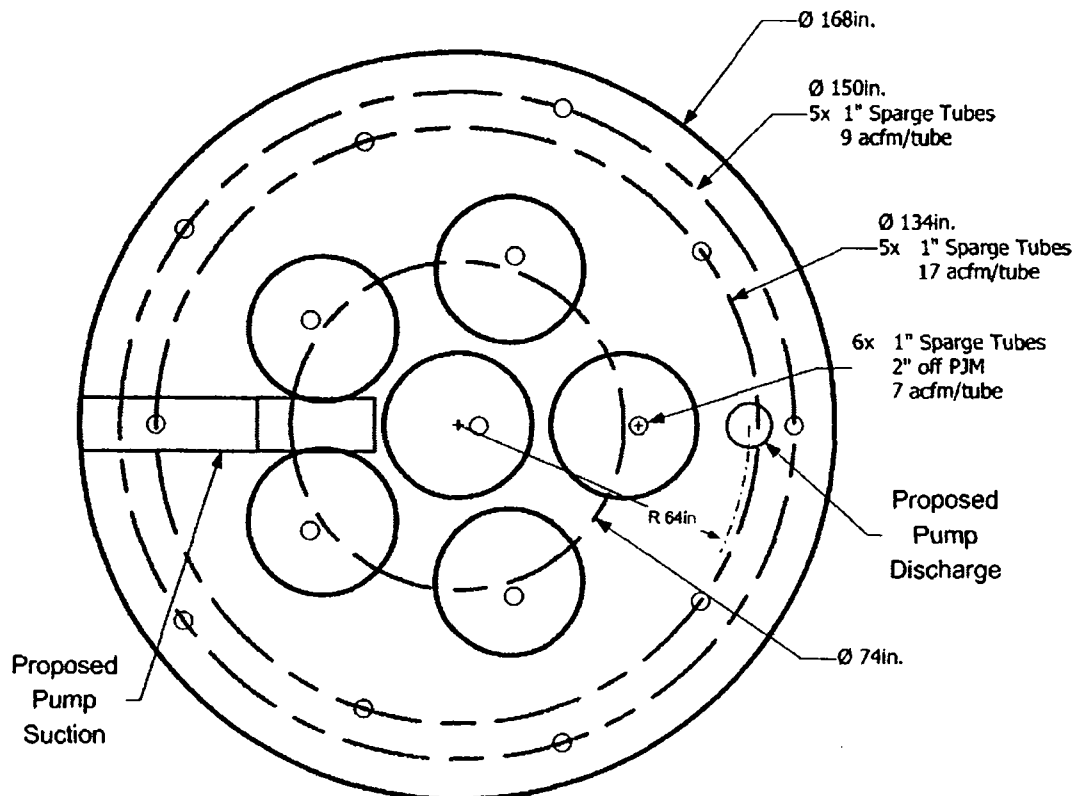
UFP-VSL-00002A/B Mixing System Layout – Plan View
